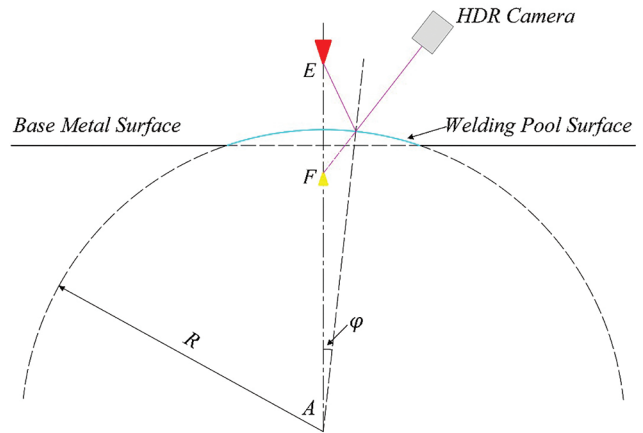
Imaging model of weld pool spherical surface.
